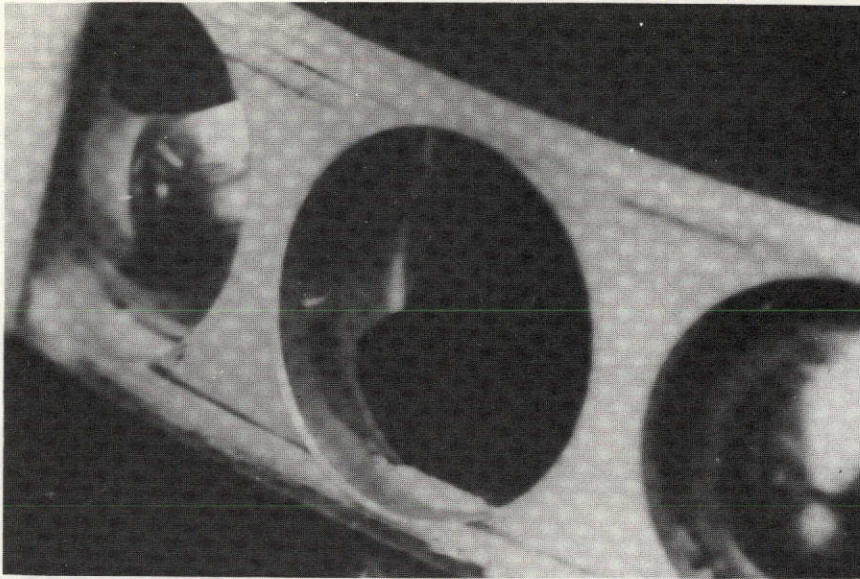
Portion of cage from drilled ball bearing 377A after 17 800-newton (4000-lbf) thrust load test.
